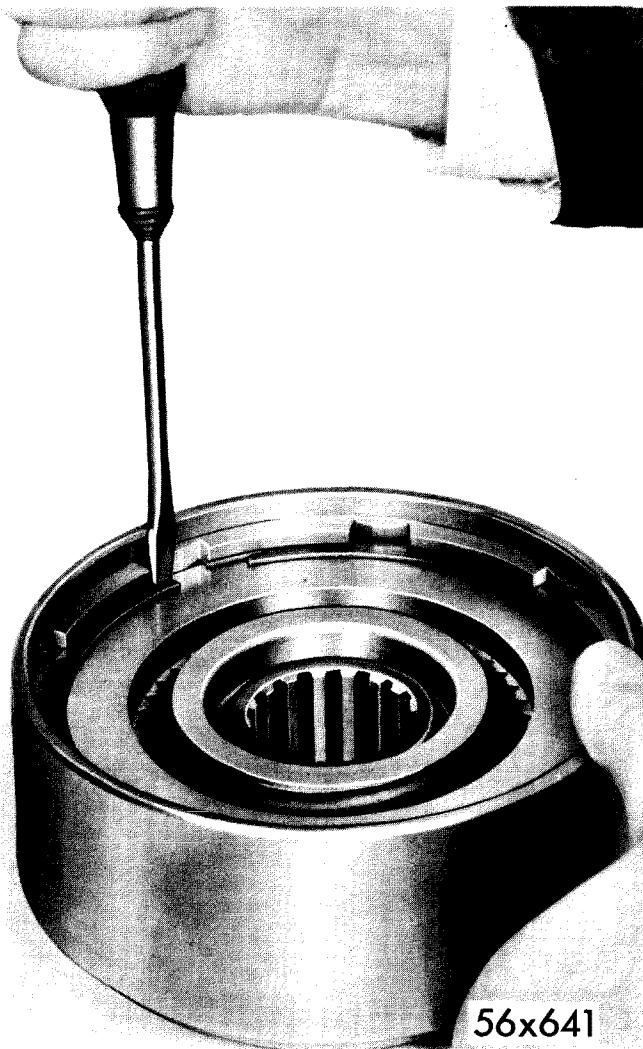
Removal and Installation of Rear Clutch Piston Retainer Snap Ring
